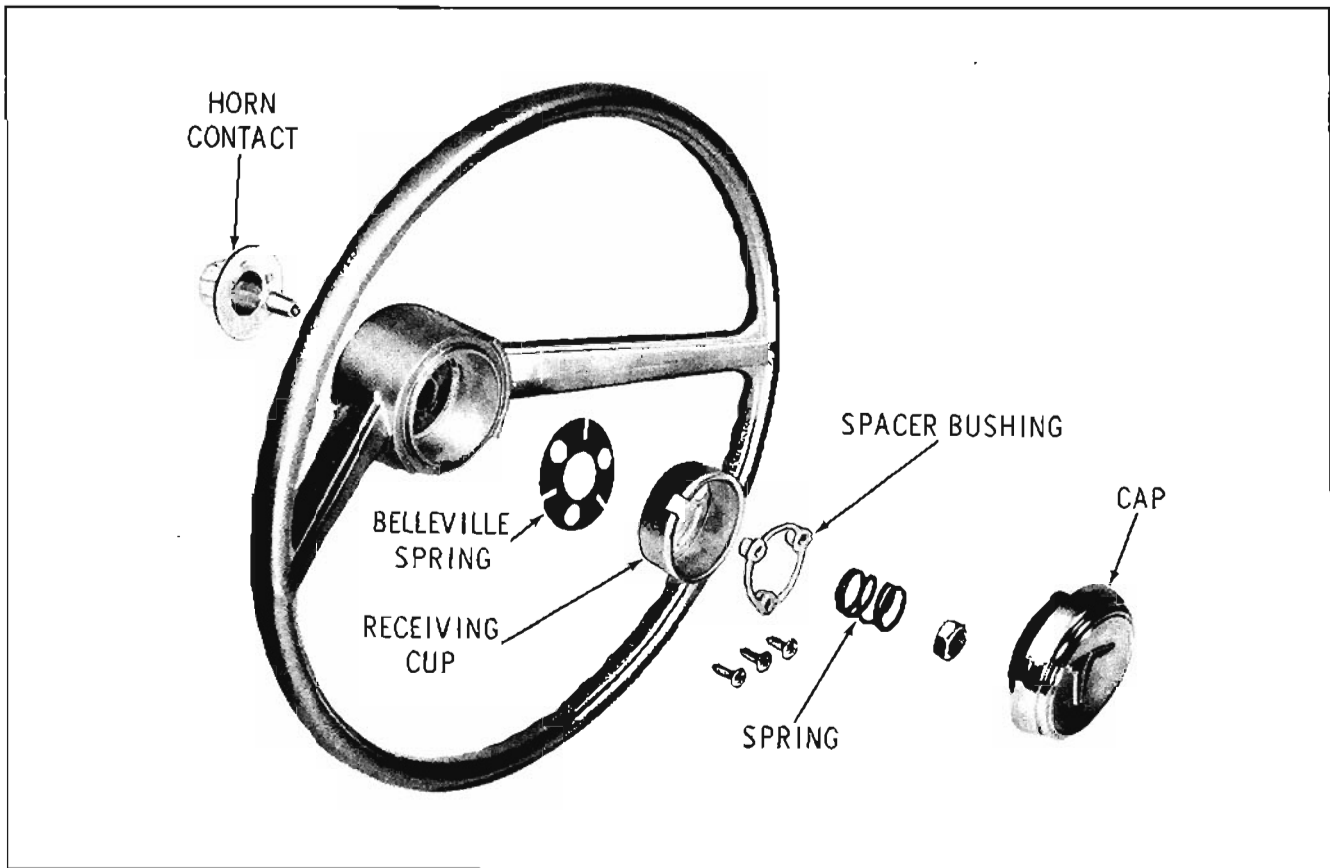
Standard Steering Wheel (30 - 31 & 32 Series)
